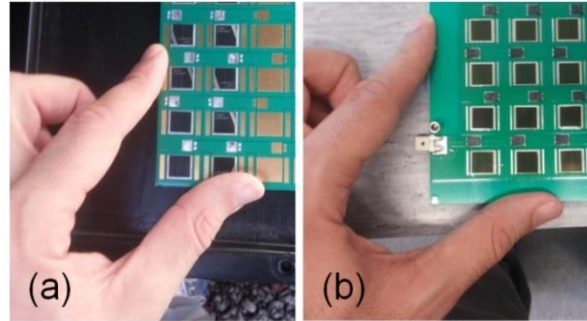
Particulars of the edges of the boards: the prototype design (a) and the improved one (b).
